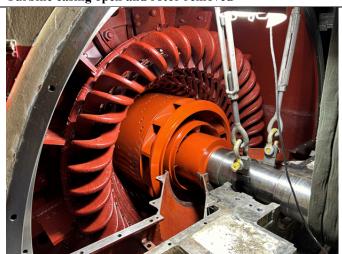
TG-2 disassembled for bearing damage – Generator re installed
